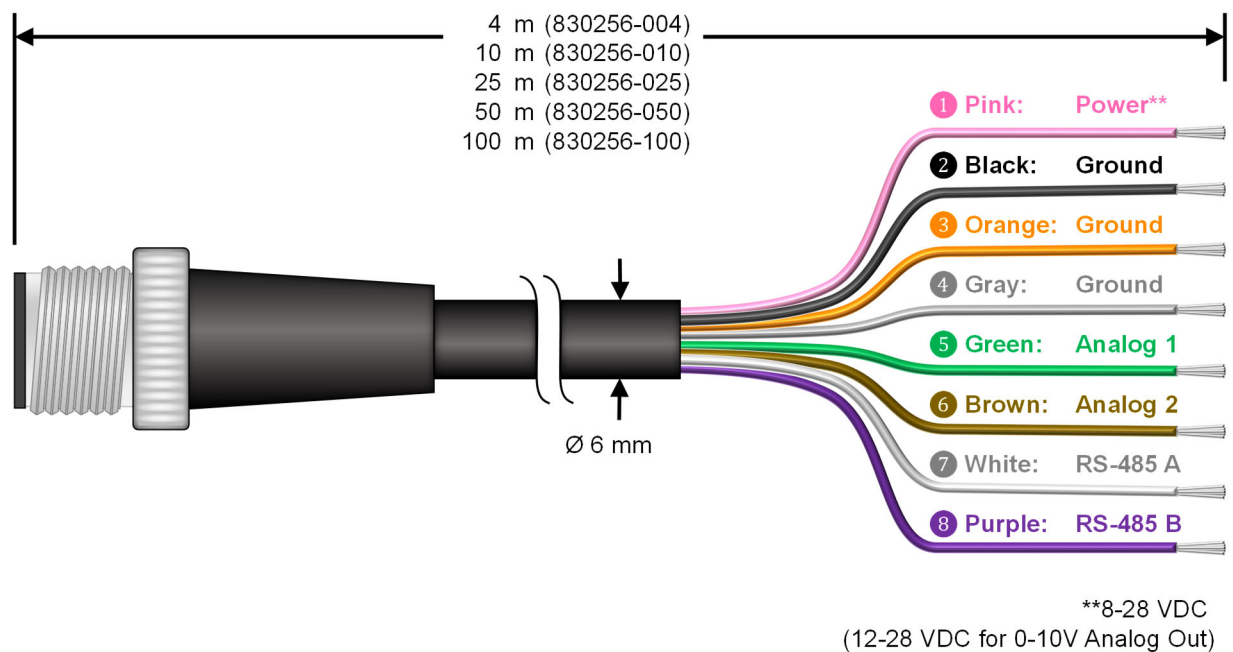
Atonometrics cable assemblies 830256-XX (sold separately)
